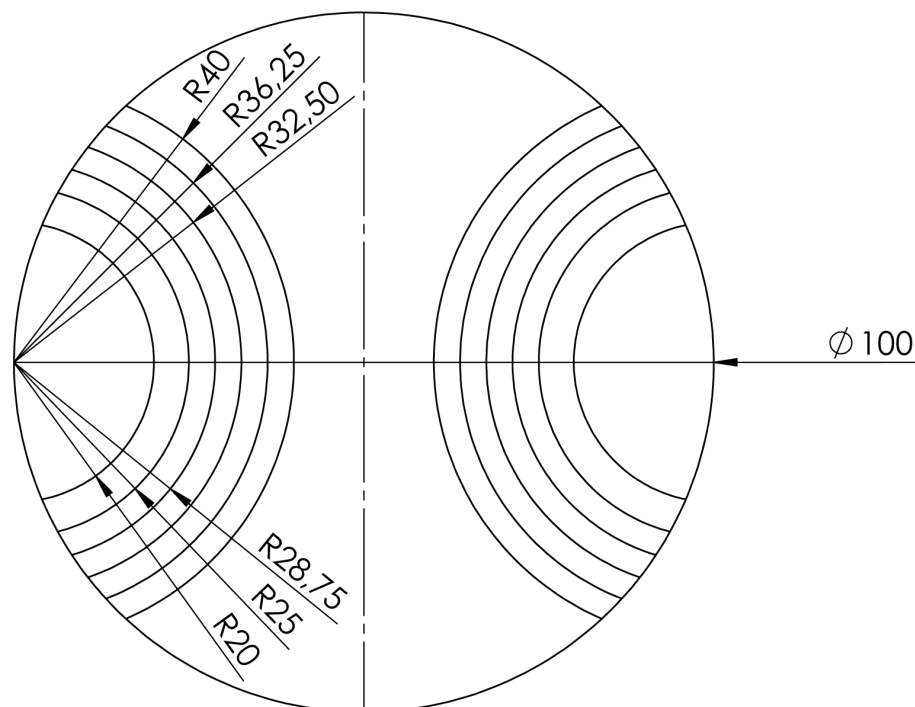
Drawing including detailed dimensions of the forming limit specimens. All values in mm.
